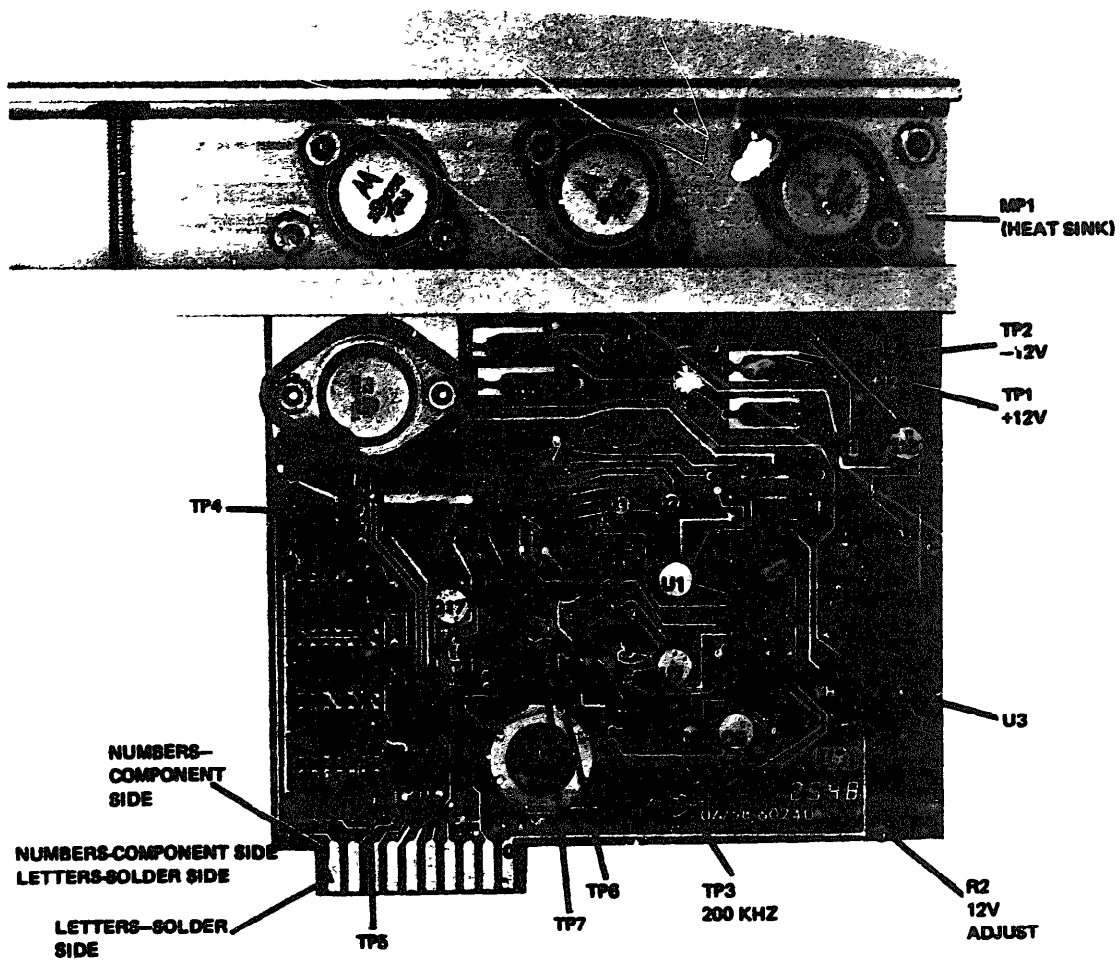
Assembly A12 or A13, Regulator/Oscillator PC, Component Locations
